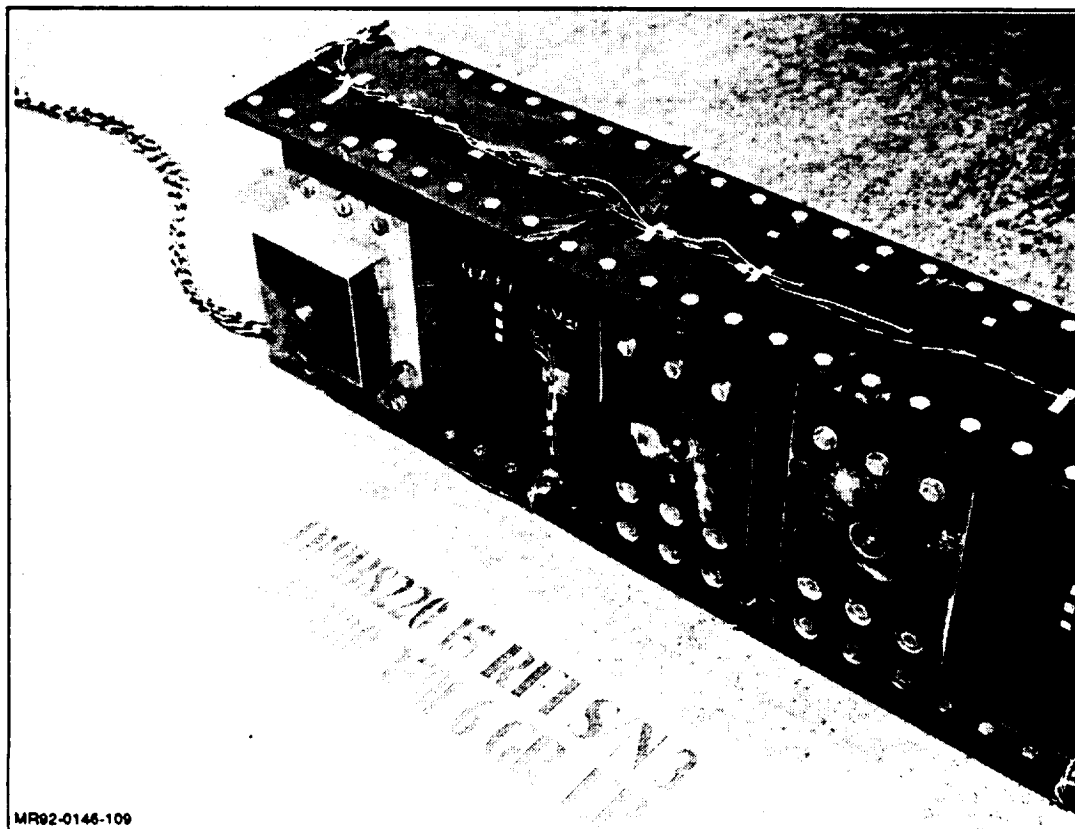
"Y"-Spar Compression Cap Failure at 6,128 μ In./In.
